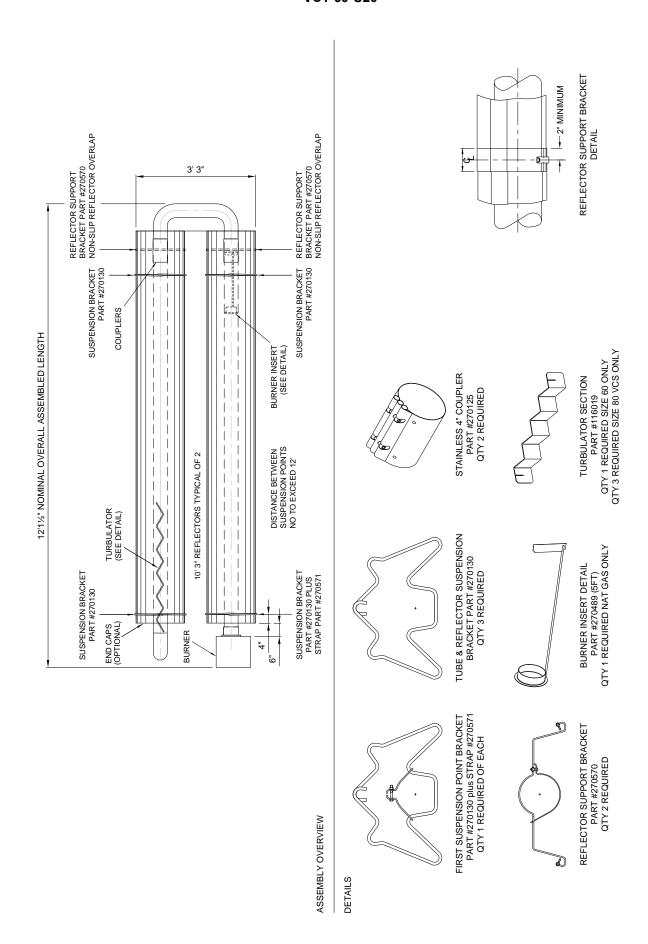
Heater Assembly: Model U tube VCS 60-U40, 80-U40, 100-U40, 125-U40 and 150-U40 VCT 60-U40, 80-U40, 100-U40, 125-U40 and 150-U40
